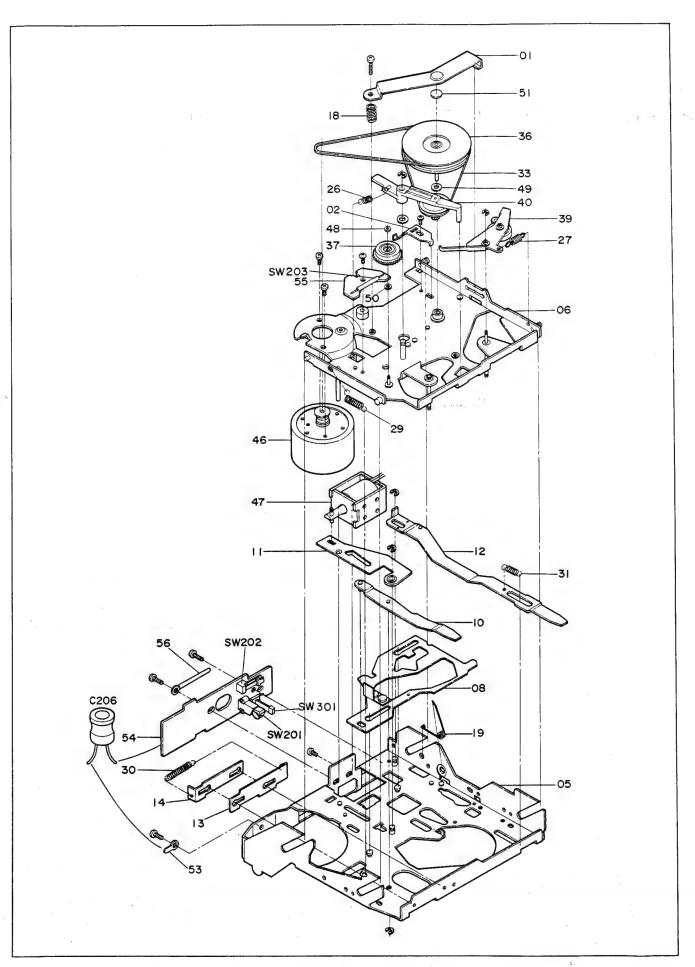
MECHANISM EXPLODED VIEW (LOWER SIDE)
